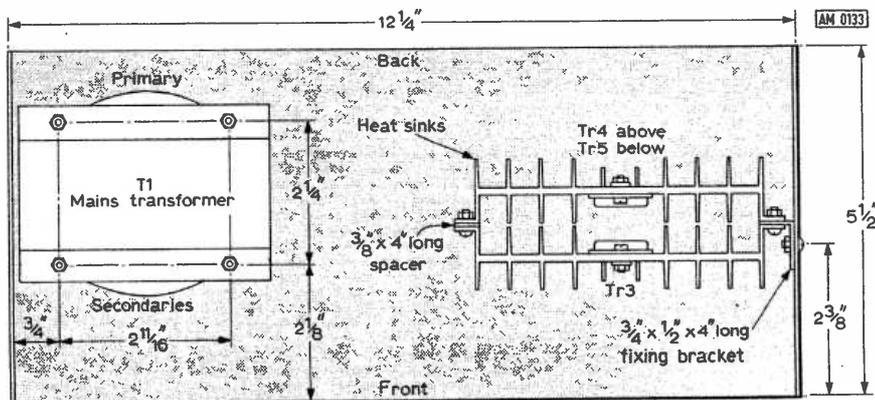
Plan view showing mounting details of mains transformer and power transistor heatsinks.
